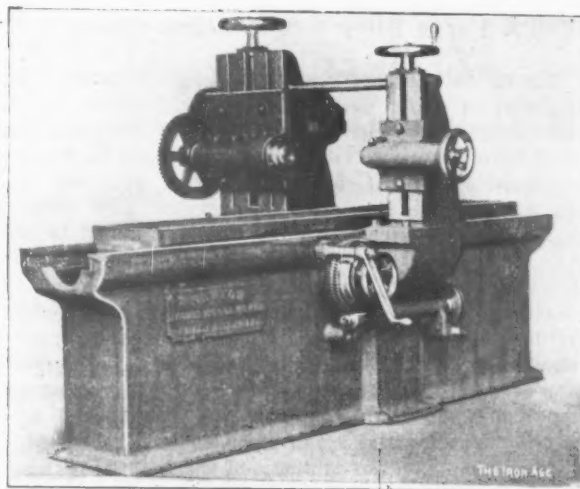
The First Newton Slab Milling Machine, Built in 1884.
